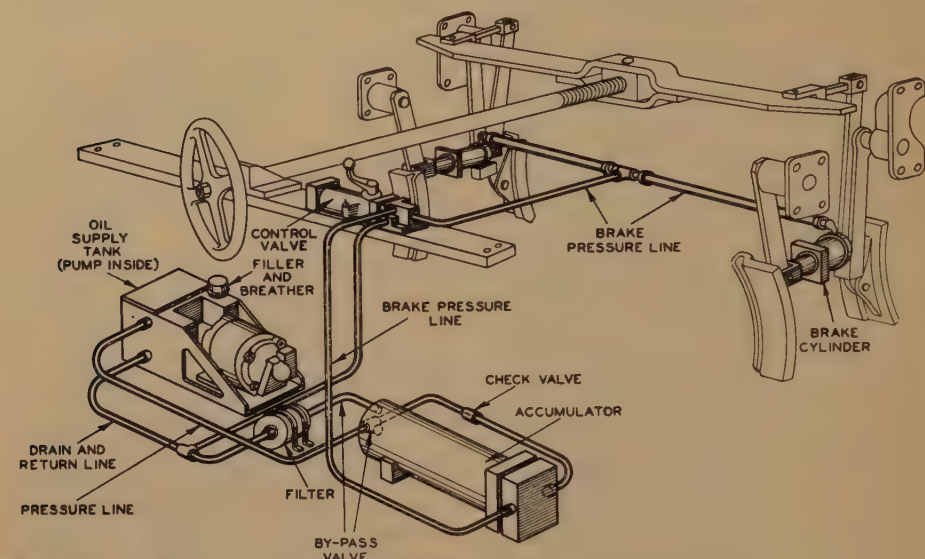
ONE TYPE OF MOUNTING OF HYDRAULIC BRAKES.
